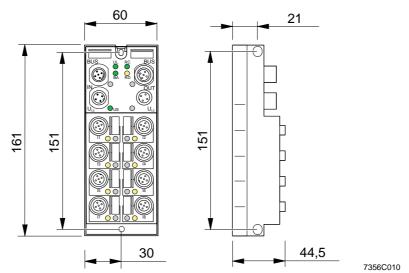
Housing dimensions in mm for Fieldline Stand-Alone devices without actuator supply
